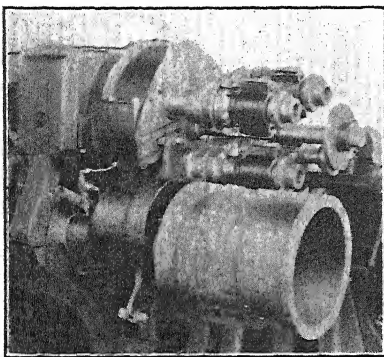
Machining a set screw of SAE X 1315 Steel from 7/8-In.-Sq. Stock in a Gridley 1 1/4-In.-Capacity, 4-Spindle, Automatic Screw Machine. The operations are indicated.
